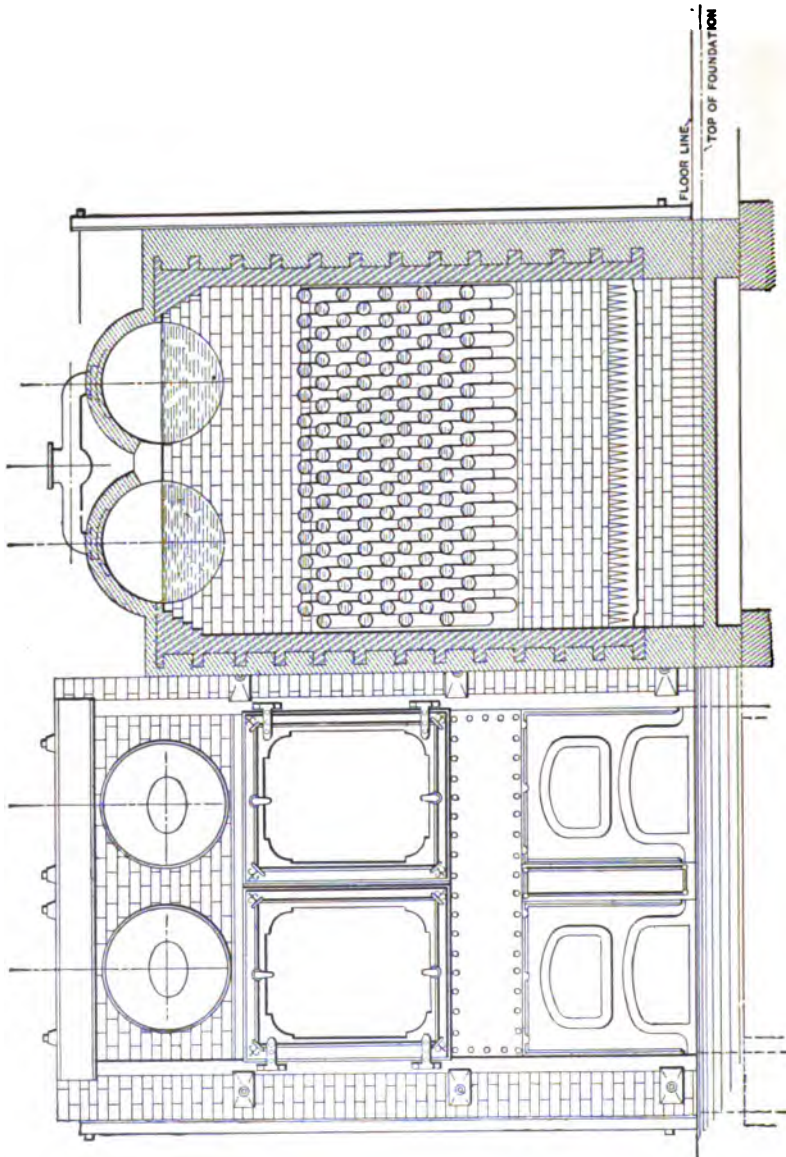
Babcock and Wilcox Boiler. Front view and section of Fig. 29.
